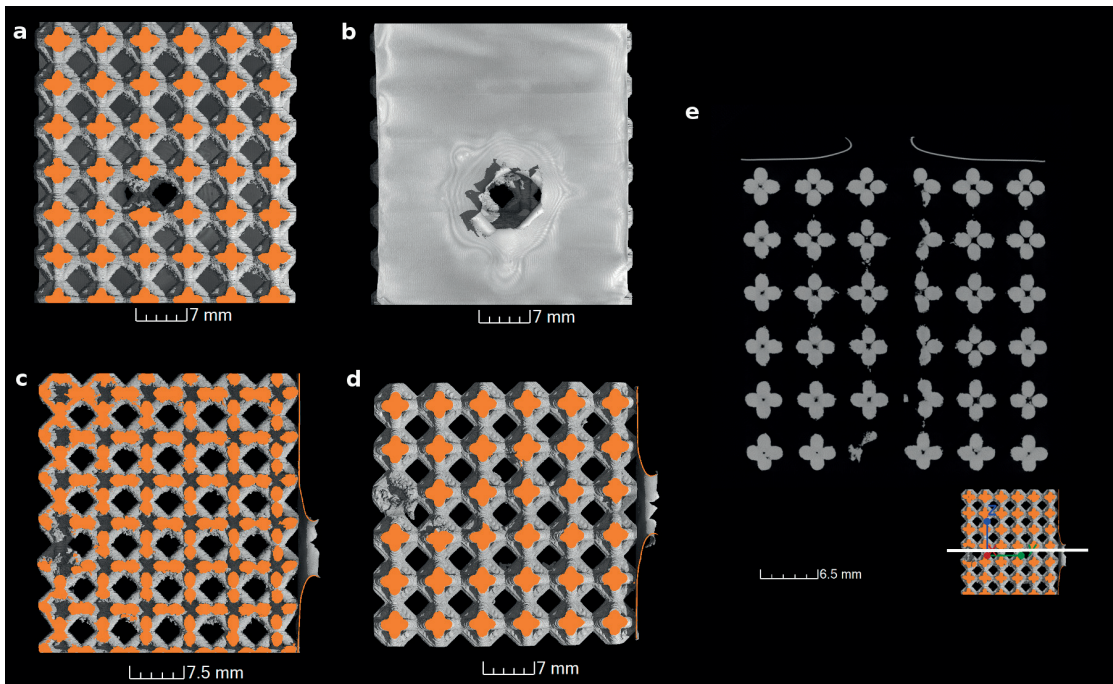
Cross-section of tested sample 7. a) Front view without MLI, b) rear view with aluminum skin, c) right view at impact hole level, d) top view at impact hole level, e) HD CT-scan image of the right view at the impact hole level (cross-section in d)). Reproduced from [216].
